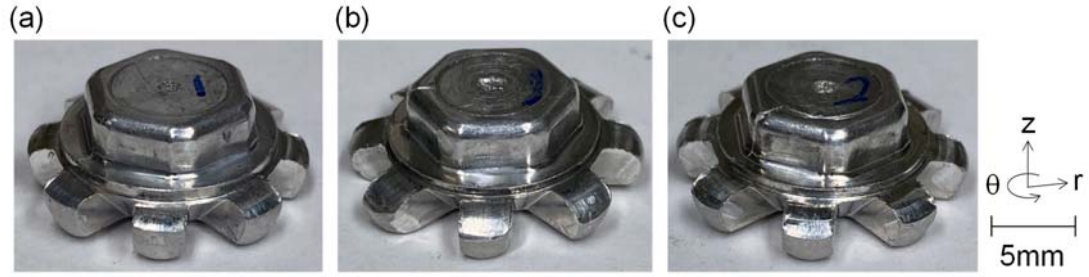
Photographs of extruded workpiece in lateral extrusion with $s = 6.7$ mm; (a) no torsion, (b) one-way torsion, (c) cyclic alternating torsion.
